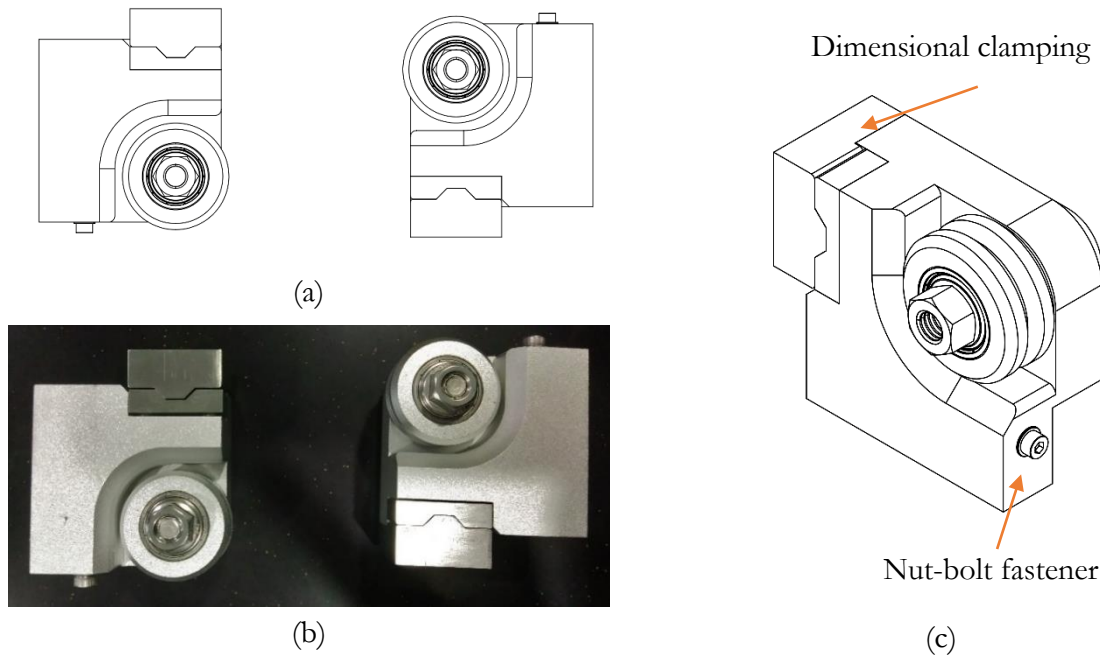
Snubbing gripper design: (a) SOLIDWORKS drawing of gripper, (b) physical fabricated gripper, (c) types of fasteners in gripper
